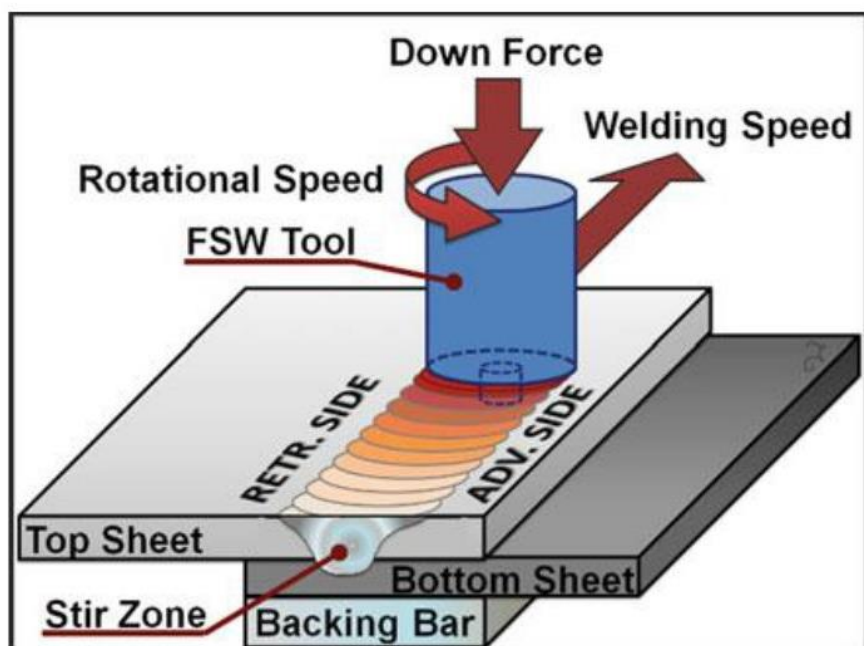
Schematic diagram of Friction Stir Welding (FSW) showing the rotating tool and applied axial load
